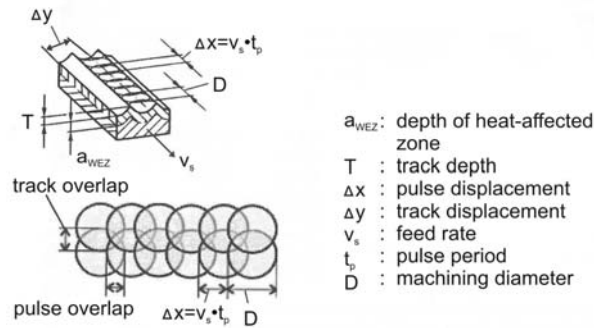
Laser machining parameters at material removal according to DIN EN ISO 11145 [14]
